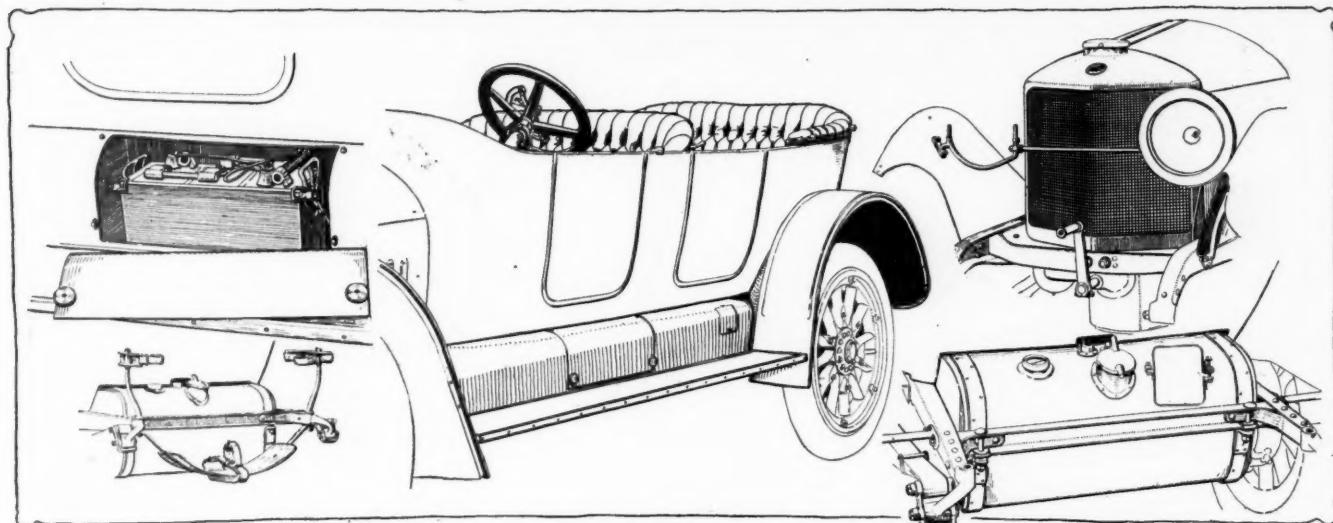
Details of the Premier body. At upper left—Battery mounting between running board and body under apron. Lower left—Details of tire carrier. Center—Body lines showing cowl. Upper right—Lamp bracket supported on fender and V-type radiator. Lower right—Supporting method used in gasoline tank, together with section of tank showing continuous bands for supporting it
